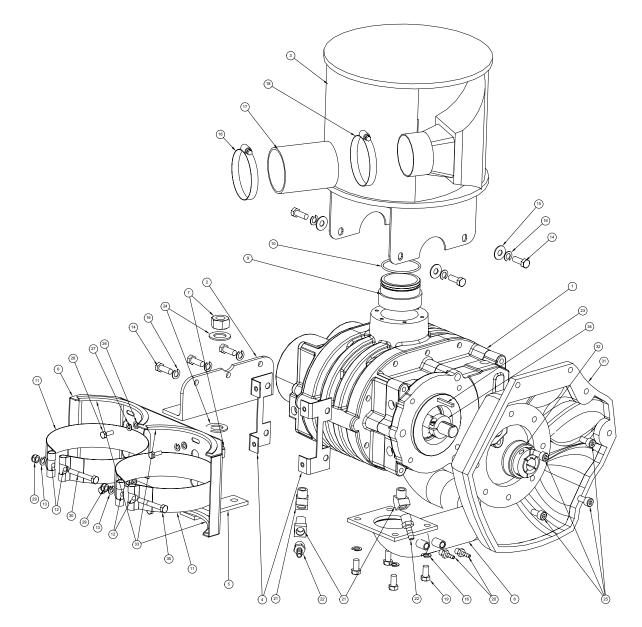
Compressor Check Valve Assembly C-6246 Rev A
